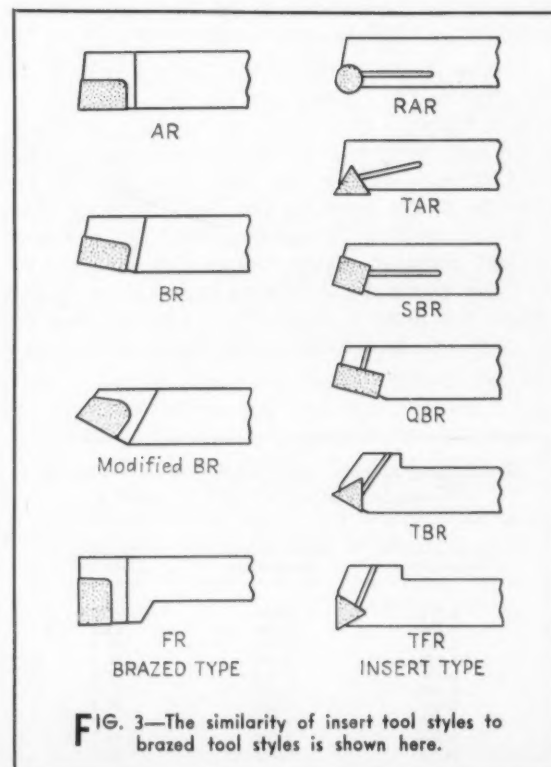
The similarity of insert tool styles to brazed tool styles is shown here.
